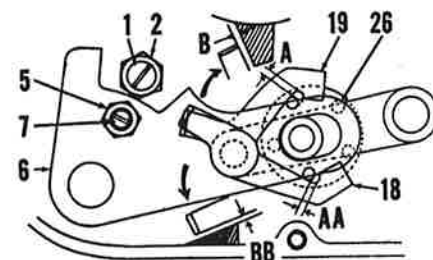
View of shift mechanism adjustment points for shifter shown in Fig. Y19-21. Refer to text and Fig. Y19-21 for legend.
